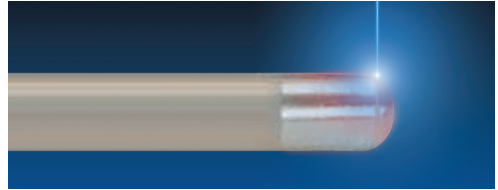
Laser Welding of Sensor Sheath
